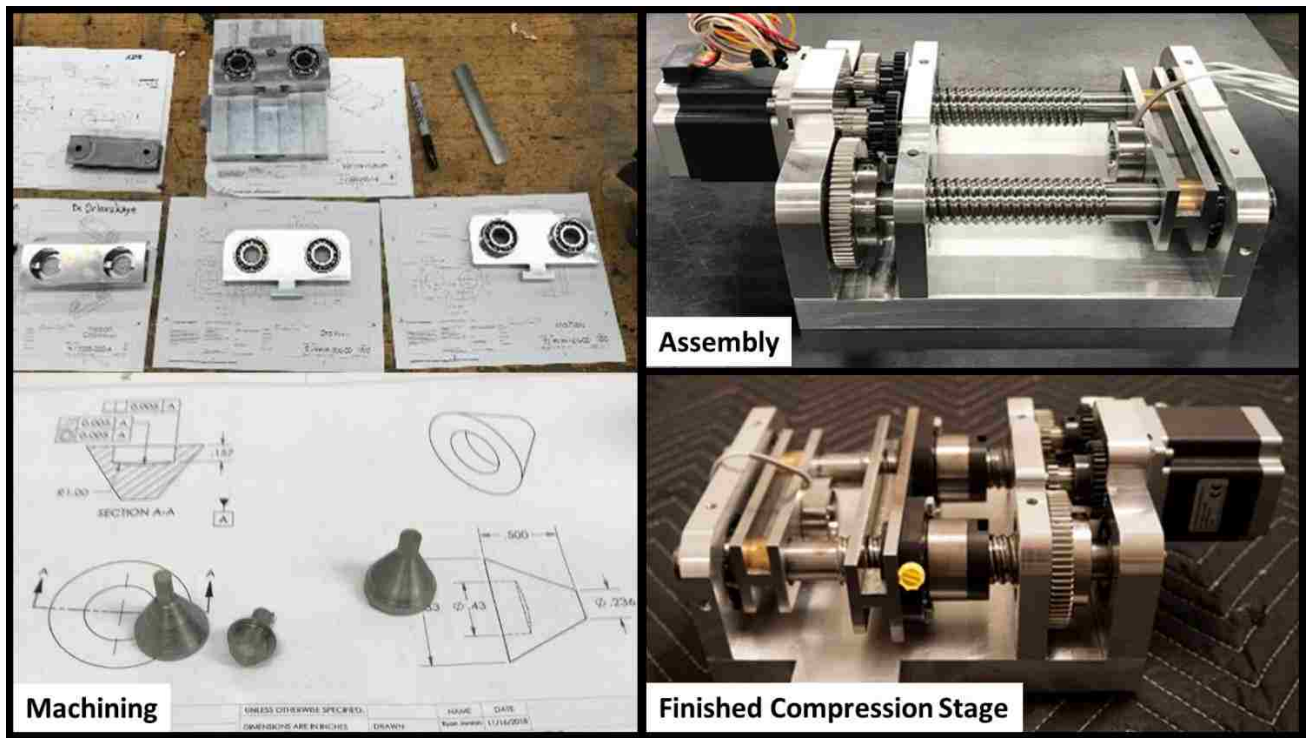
Compression fixture machining, assembly, and finished compression fixture.
